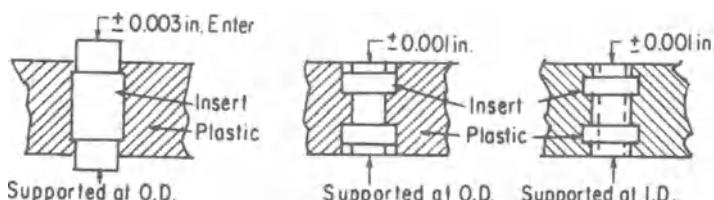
Generally, through inserts must be molded ± 0.001 in. (0.0025 cm) of length to ensure their making contact with both mold surfaces.
